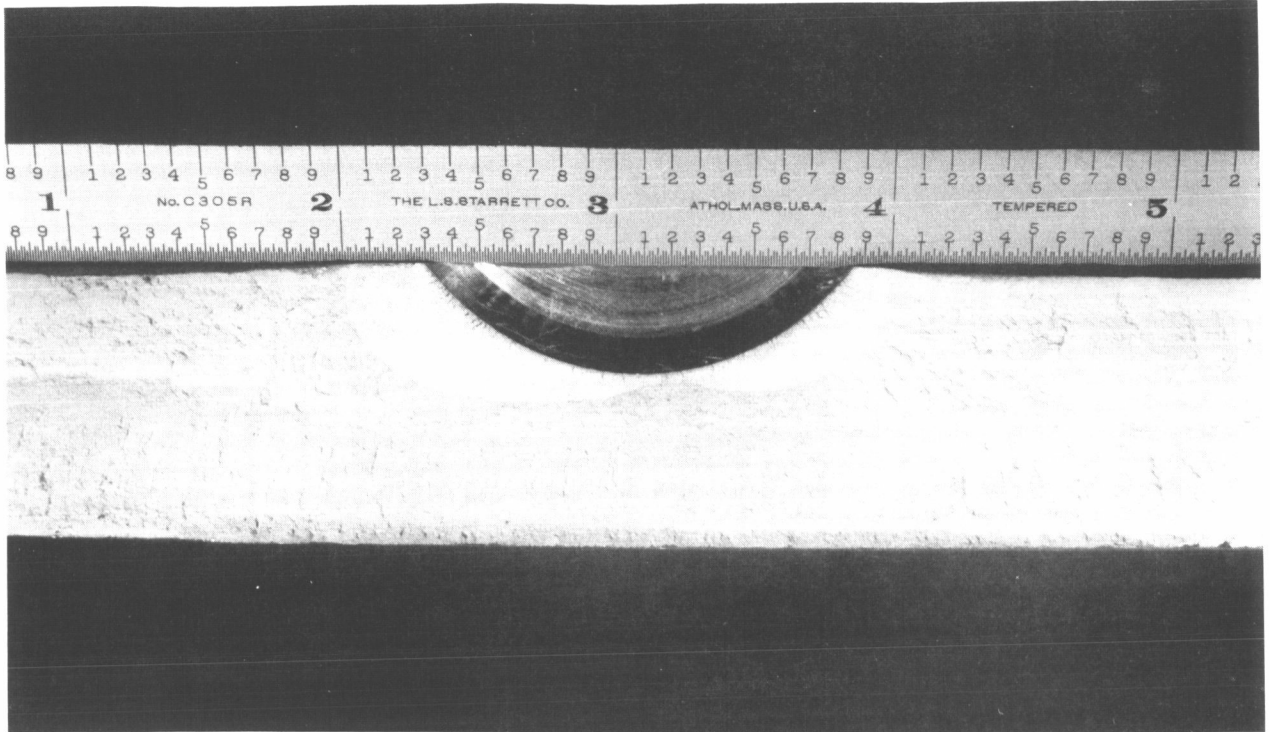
Fracture Surface of Welded 2219-T81 Aluminum Plate (Crack in Fusion Line, 75° F)
